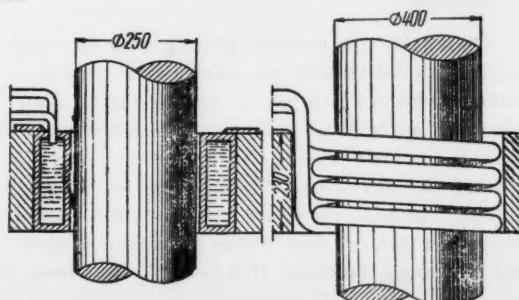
Layout of coolers in the arc-furnace roof masonry.
